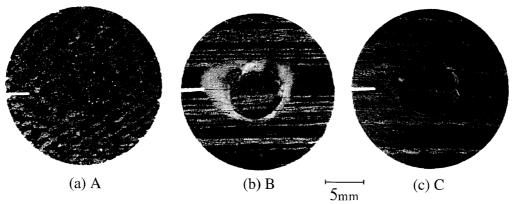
Typical fractures in the thermal shock fracture toughness test of HUD-1S.
